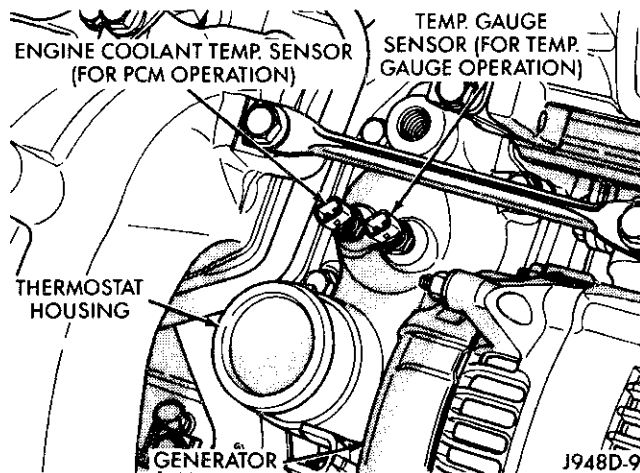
Engine Coolant Temperature Sensor—8.0L Engine
